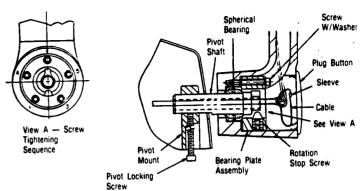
WIRE SIDE PIVOT SHAFT ASSEMBLY.
